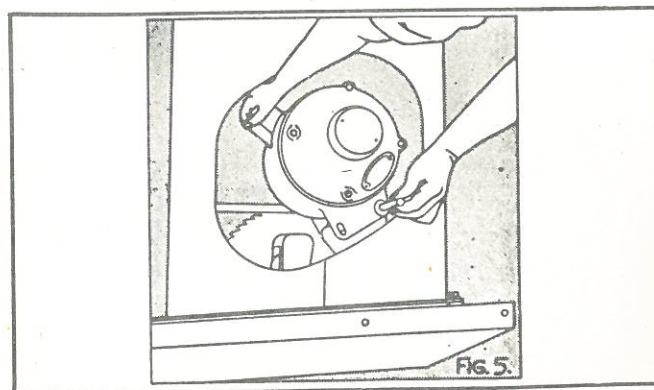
shows the easiest method of holding the motor for assembly into the cabinet.
